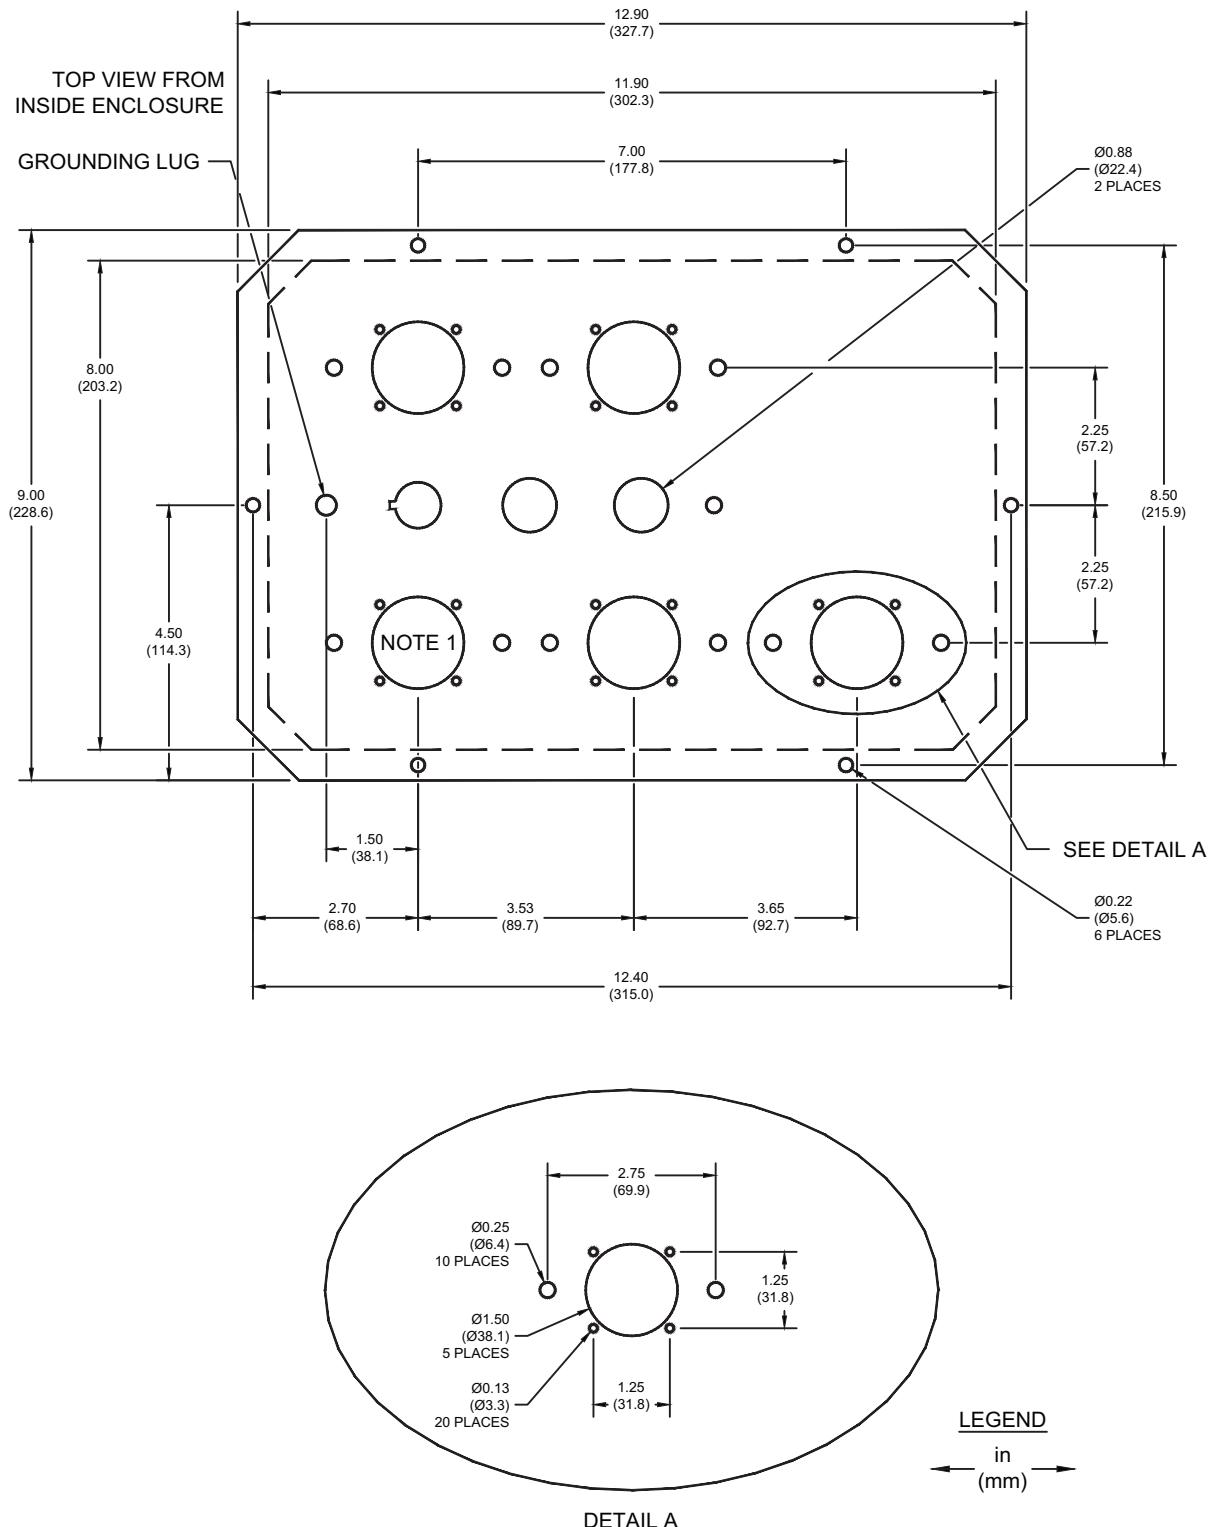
SEL-651R-2 Enclosure Dimensions and Mounting Drill Plan (Dual-Door Enclosure)
